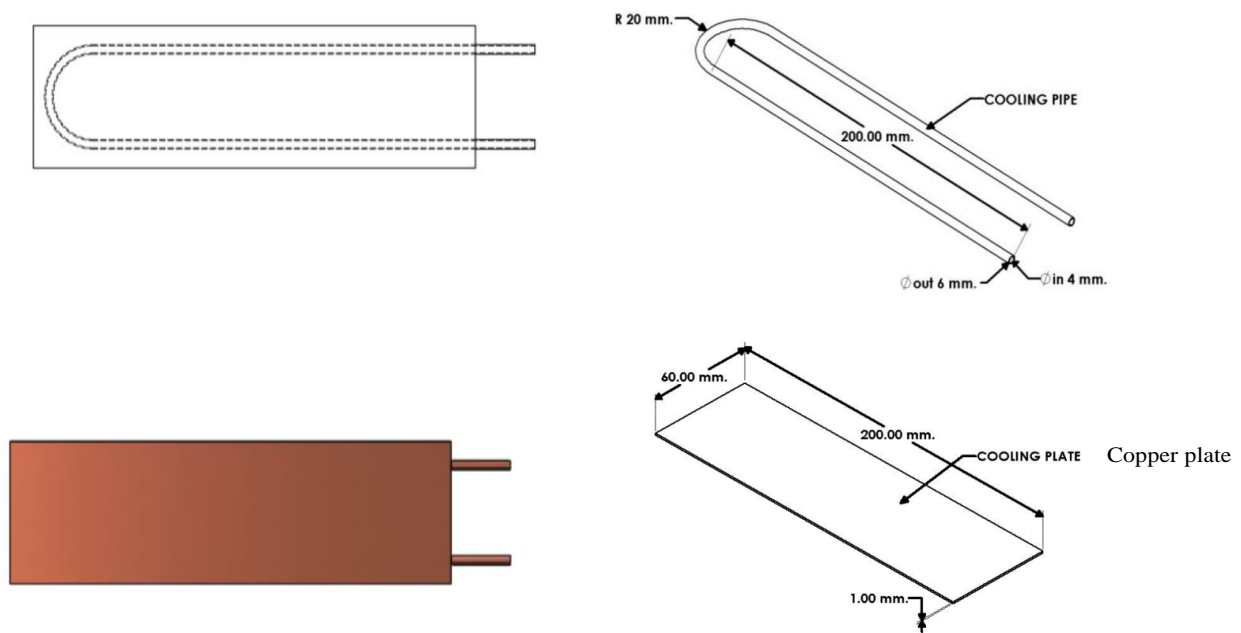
Copper plate and tube heat exchanger (Cold side heat sink).
